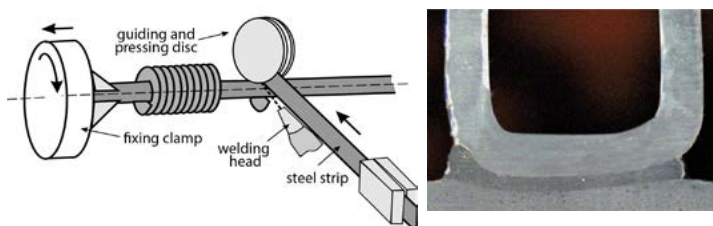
MAG welding of ribbed pipes: a) scheme of under-rib welding, b) ribbed pipe with a smooth rib made using under-rib welding [11]
